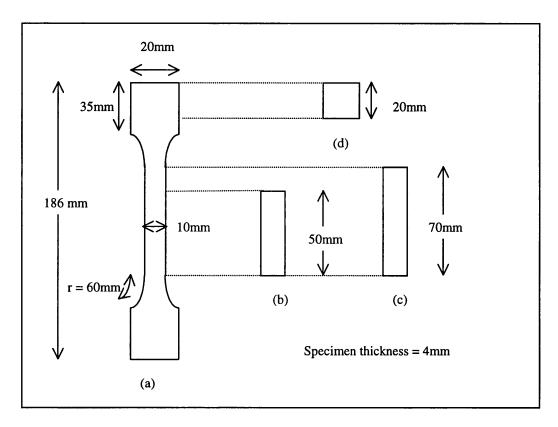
Injection moulded sample geometry showing (a) dog bone shaped tensile test piece (b) DMTA test piece (c) Impact test piece (d) Viscosity test piece.
